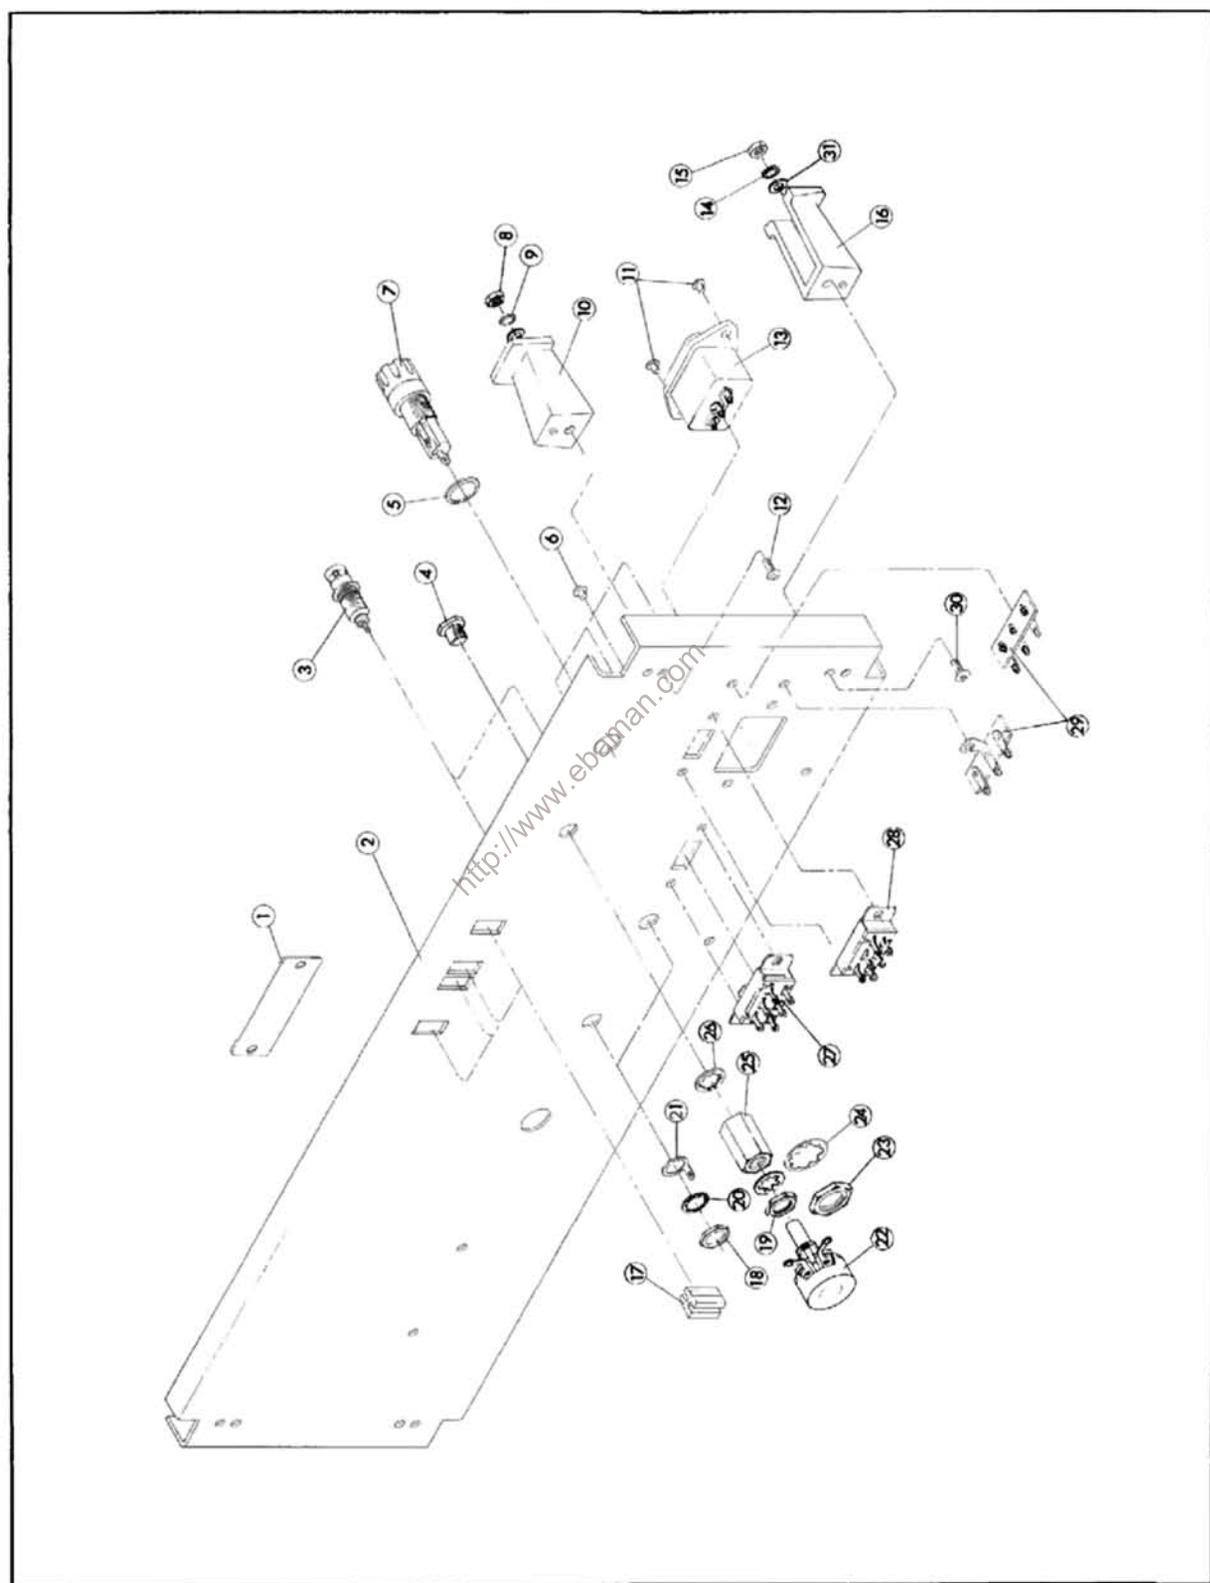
Exploded View of Rear Panel (sheet 1 of 2)
